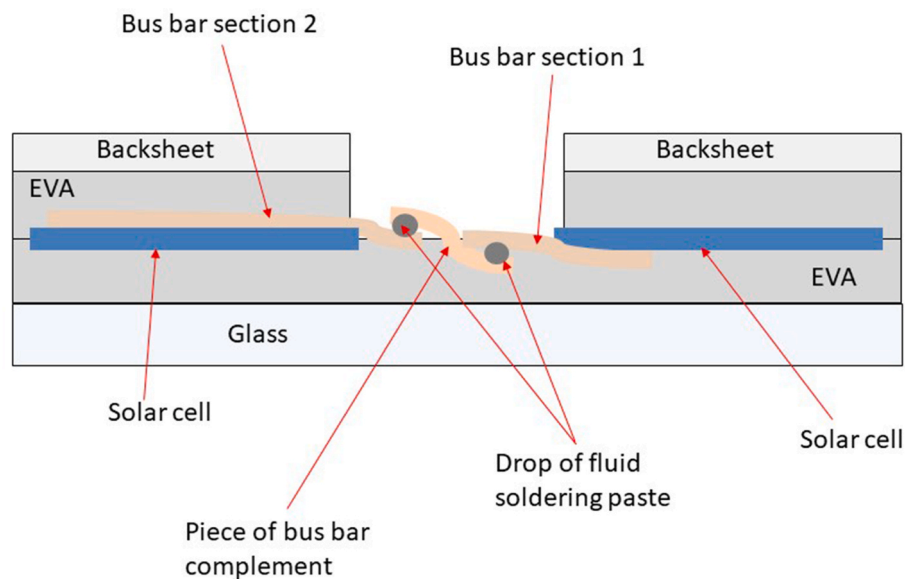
Scheme of the layout of the two cells, the interrupted bus bar, the additional piece of bus bar and drops of fluid soldering.
